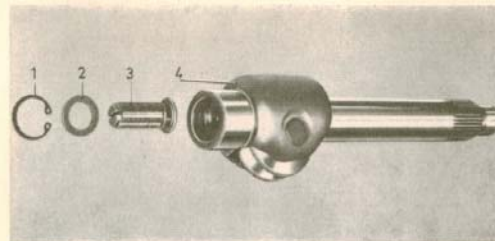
Fitting the pitman arm shaft bushing
